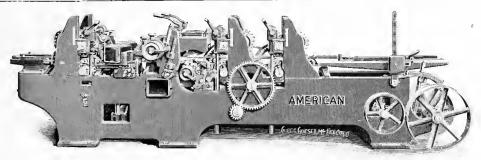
No. 131. American Planer and Matcher. Works 9 in. and 15 in. Wide by 6 in. Thick.
